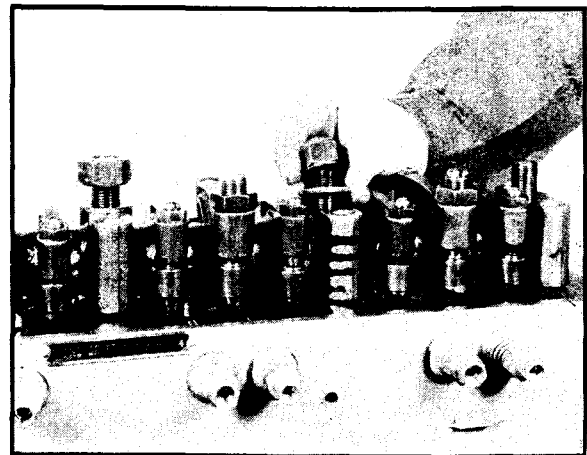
Assembling cylinder head stud nuts and flat washers
